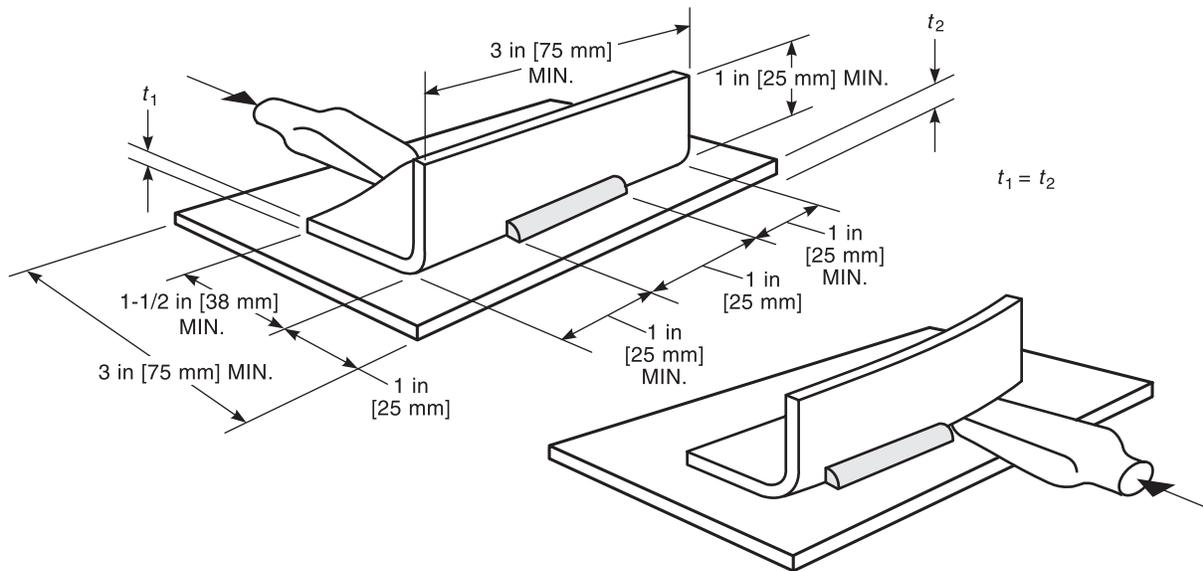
A—Test for Sheet to Sheet Flare-Bevel-Groove Welds [see 4.6.3.2(1)(a)]
